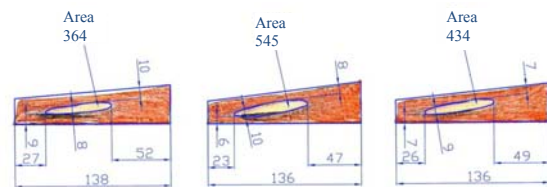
Examples of the gear wheel contact areas with typical dimensions
